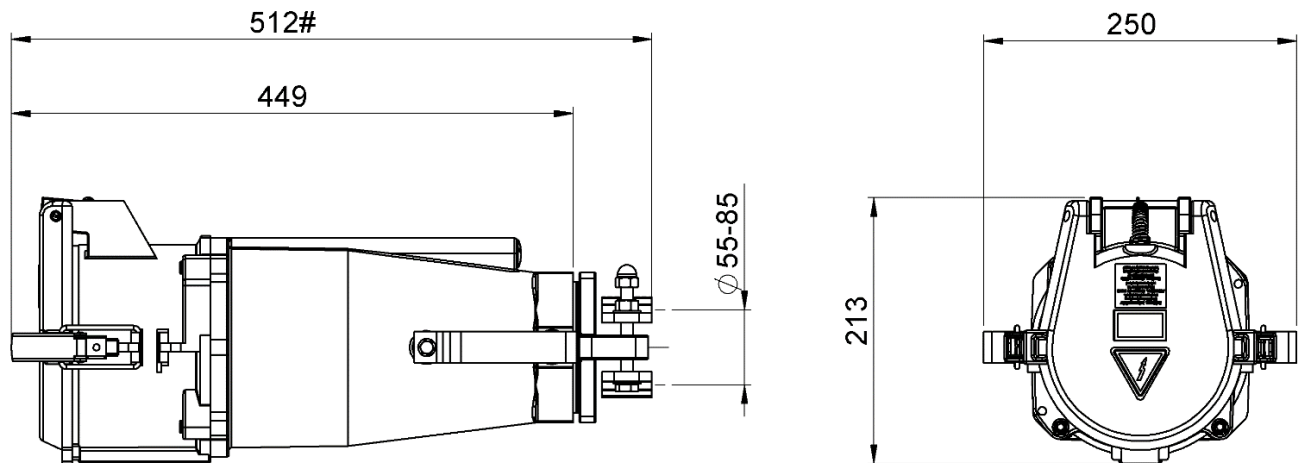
Dimensions Female Connector FC A-Line (500 A – 600 A) in mm
